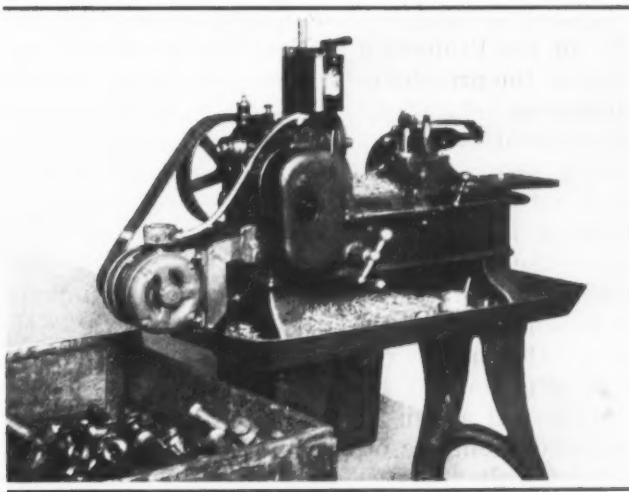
This Lathe is Now a Self-contained Unit, Driven by a 3/4-horsepower Electric Motor Supported at the Forward End by a Welded Bracket
